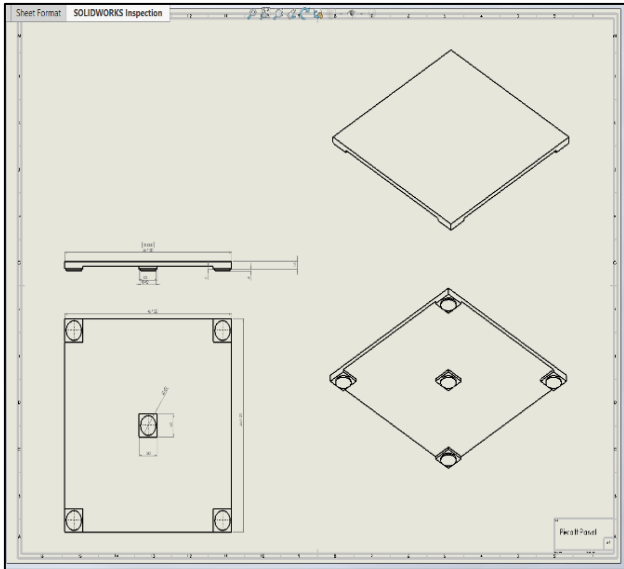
CAD Drawing for the Tiles (Piwatt Panels)
